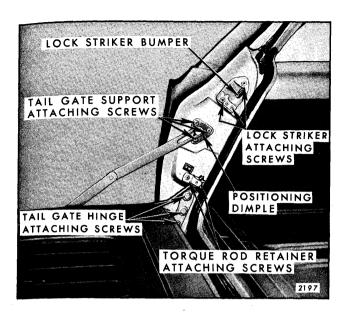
Tail Gate Torque Rod, Hinge and Support Attachments "B & A" Body Styles
